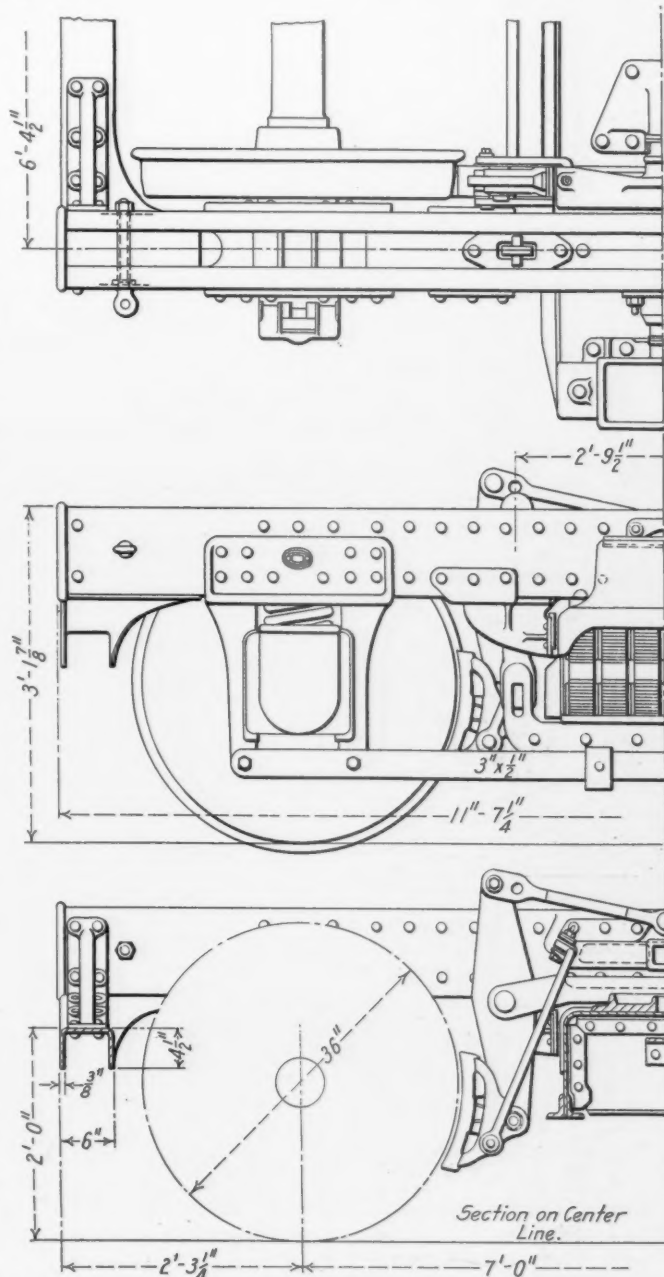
One End of Original Four-Wheel Steel Passenger Car Truck Before the Application of the Clasp Brakes; Pennsylvania Railroad
